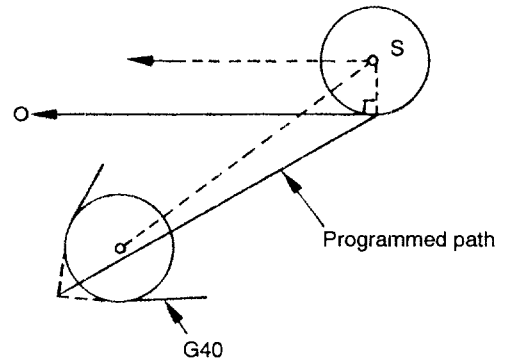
Offset Start-up (Straight-line to Straight-line (2))
